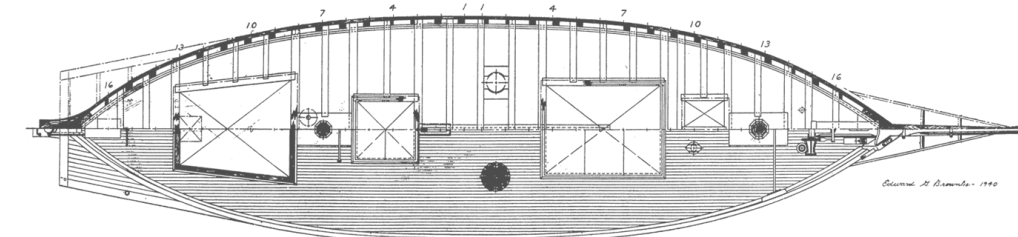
PLATE XVI B. STRUCTURAL PLAN OF FRAME BUGEYE Lizzie J. Cox.
